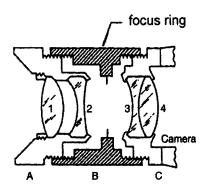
Schematic diagram of a differential thread focus mechanism. (From Jacobs.²⁷)
